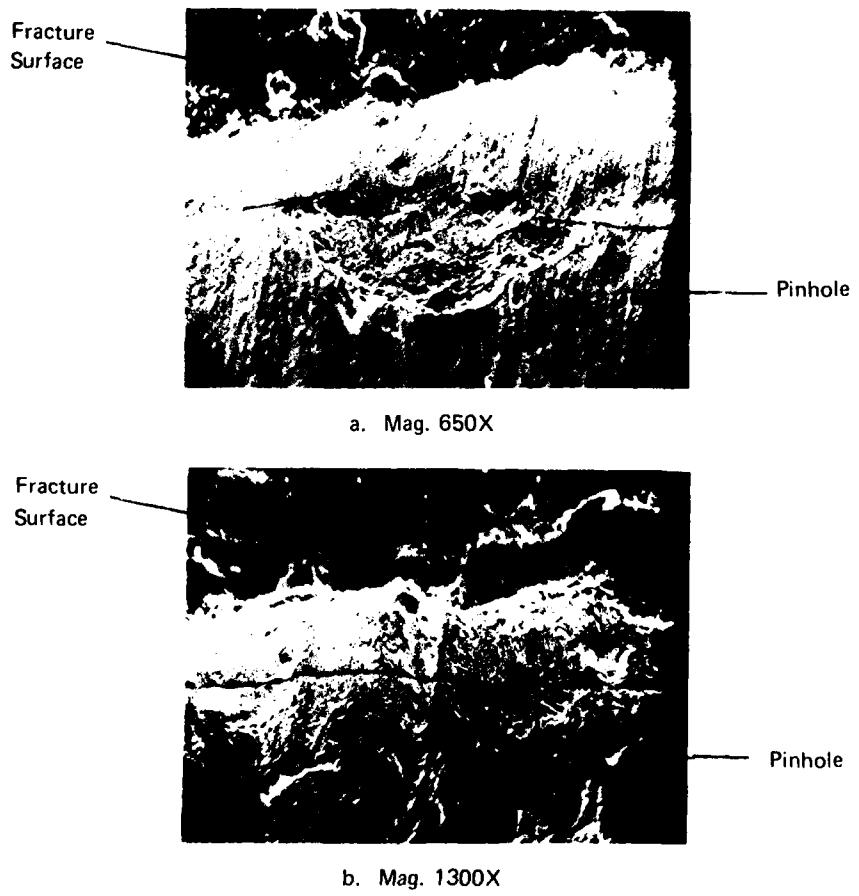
Fatigue cracks emanating or passing through fretting damage in pinhole.
